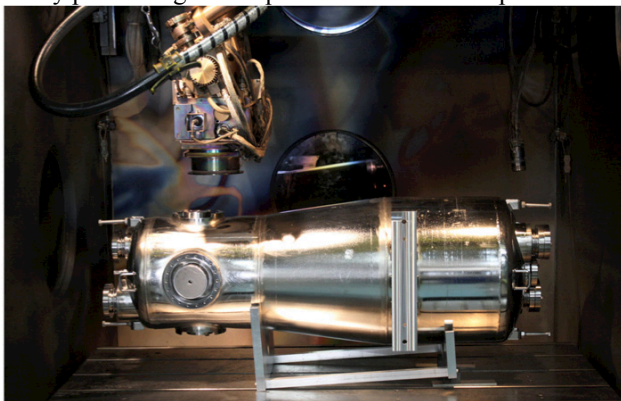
Final cavity welding in e-beam weld chamber.
